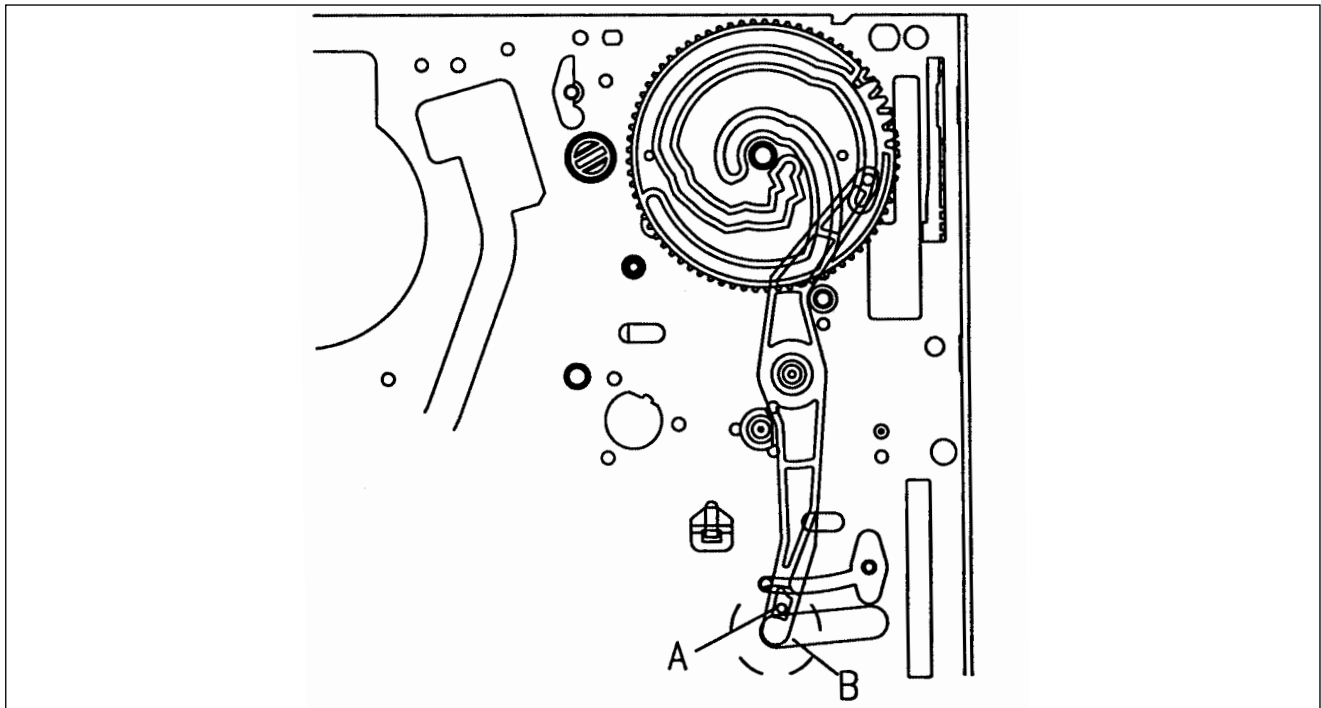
Mechanical Checks/relay Lever and Cam Gear Alinment
